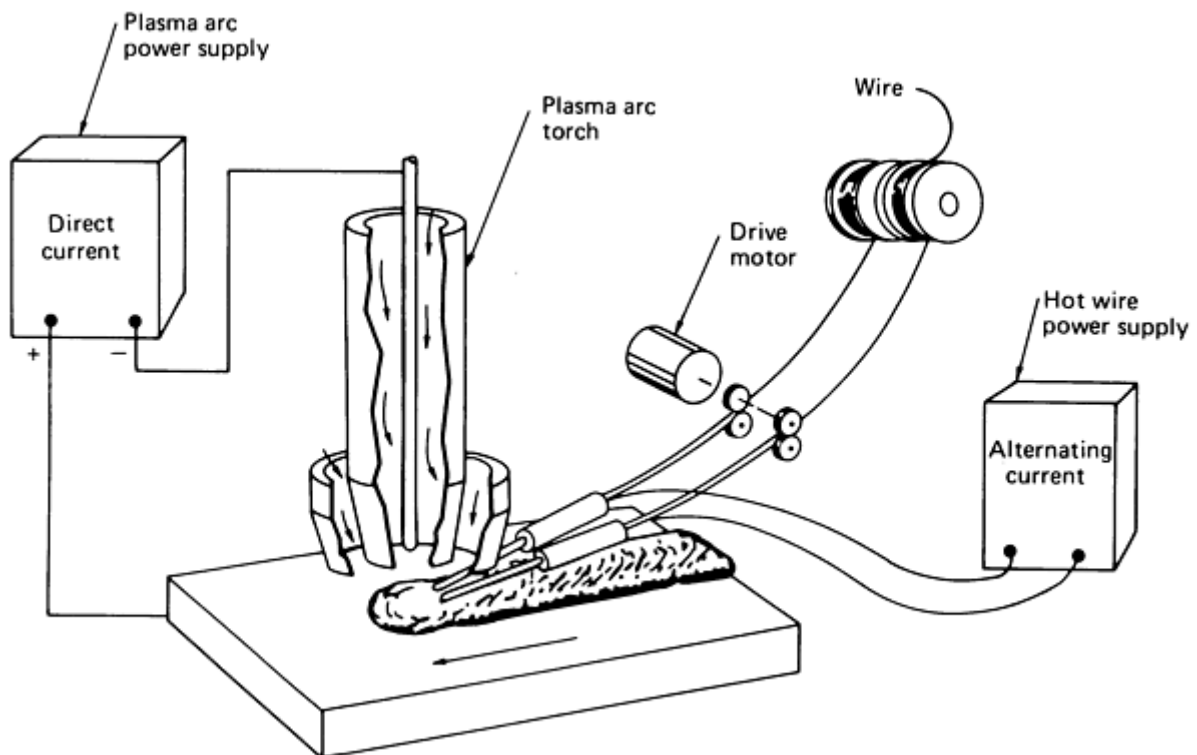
SCHEMATIC OF THE PLASMA ARC HOT WIRE WELD CLADDING PROCESS. SOURCE: REF 1
